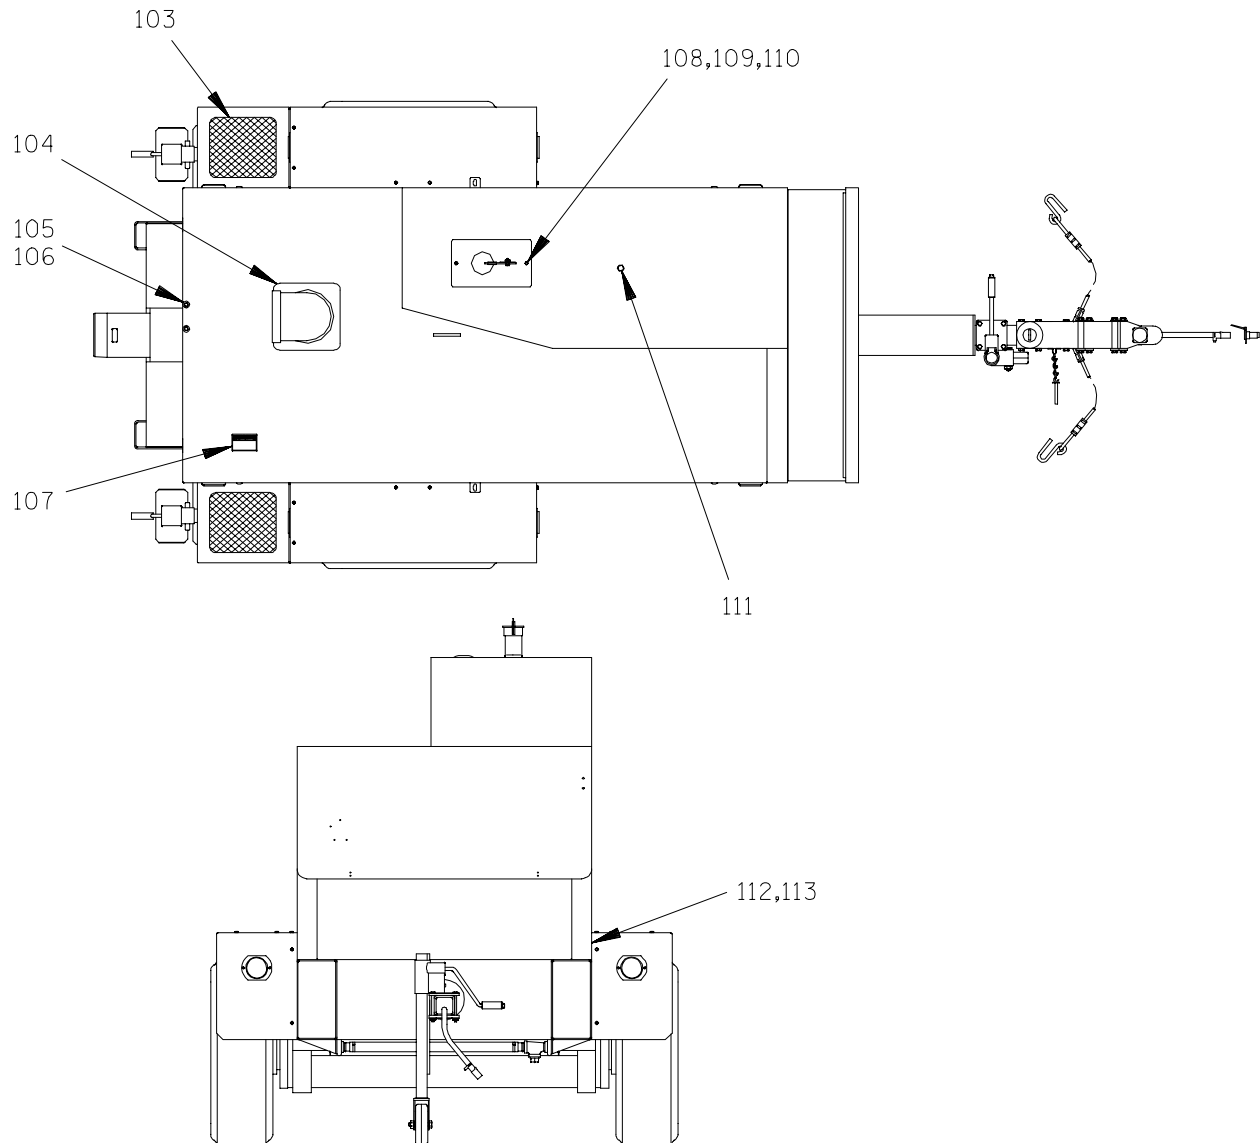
T6A3-F4L-SPA Pump Assembly (Cont'd)
